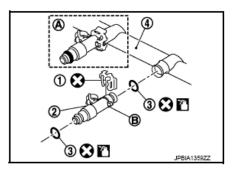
Identifying Fuel Injector And Fuel Tube Related Components Courtesy of NISSAN NORTH AMERICA, INC.
